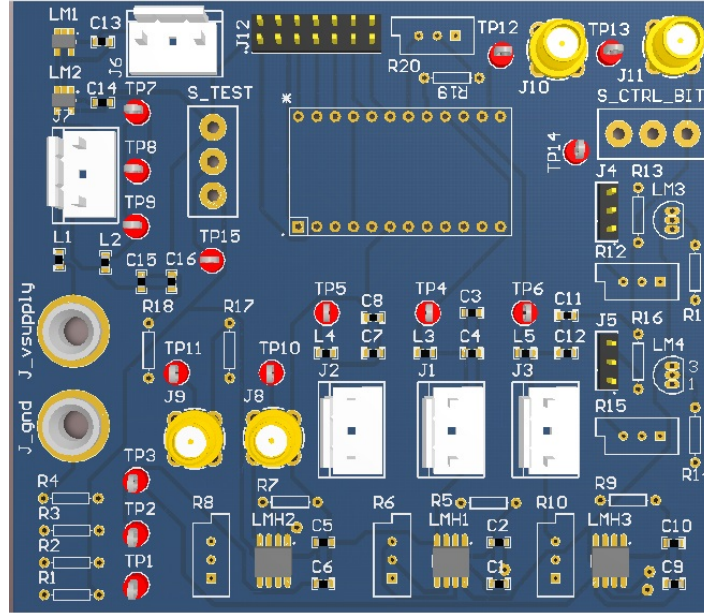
3D Top layer of the BCB board test in Altium.
